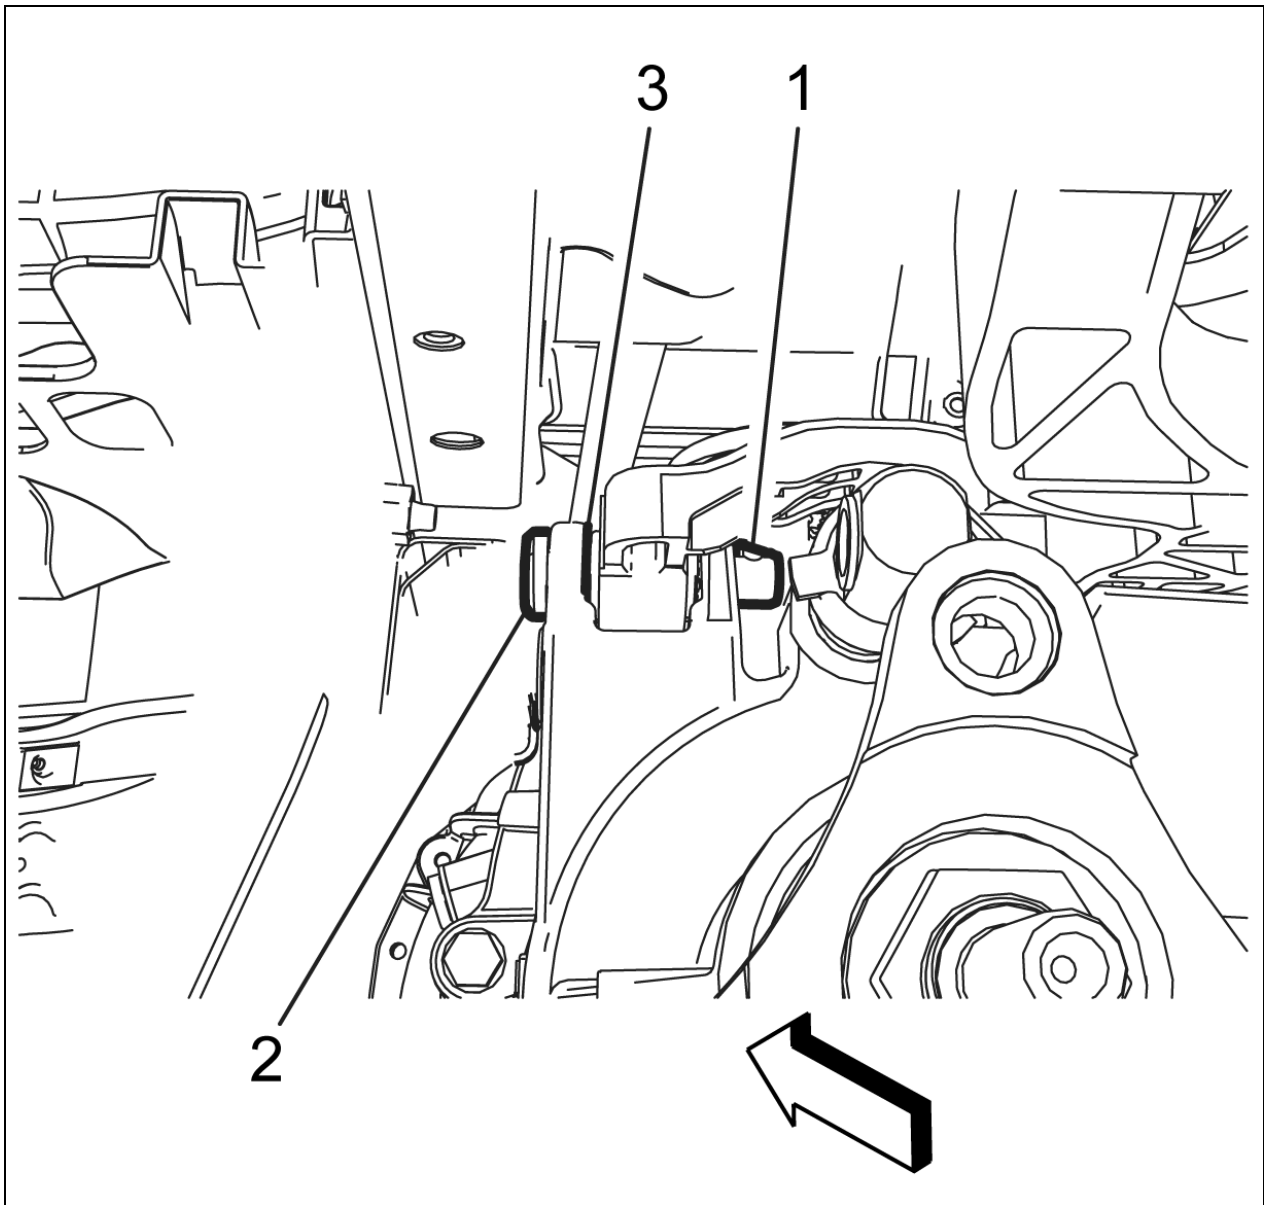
Right Side Shift Control Rod Pin Retaining Tab
